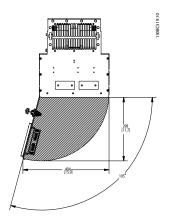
Front Clearance of IP21/IP54 Enclosure Type, Frame Size D1h, D5h, and D6h.
